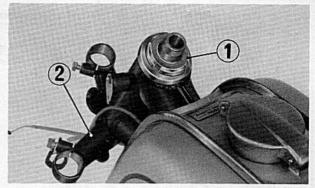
(1) Steering head top thread (2) Steering stem
